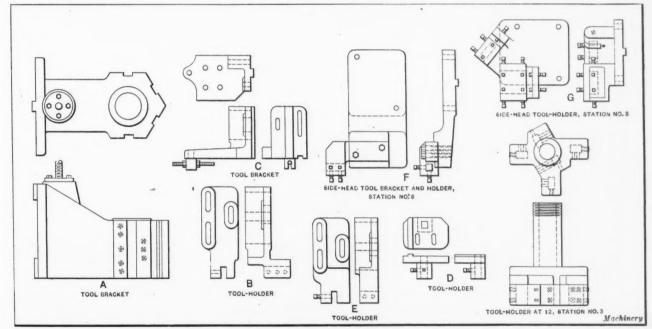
Design of Tool Brackets and Tool-holders used on the Main Turret and on the Side-heads of the Machine employed for the First Sequence of Operations
